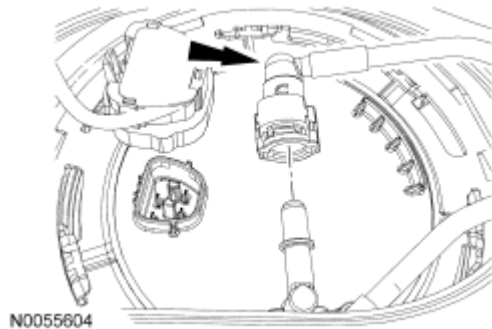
Identifying Fuel Supply Tube-To-Fuel Pump Module Quick Connect Coupling
